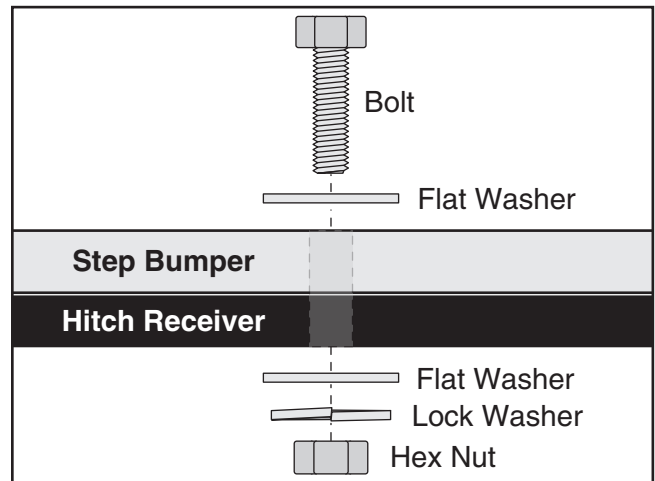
Fastener configuration for attaching the hitch receiver to the step bumper.
